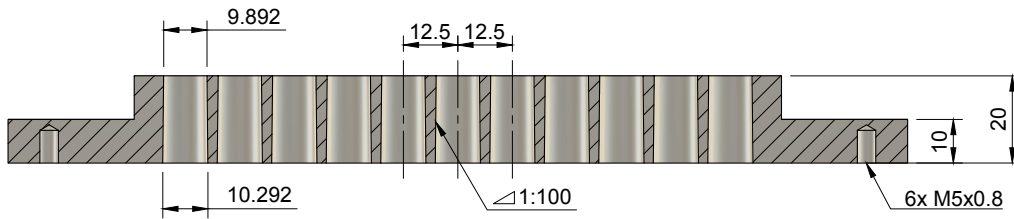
Cross-section of the bearing plate with relevant dimensions indicated.
